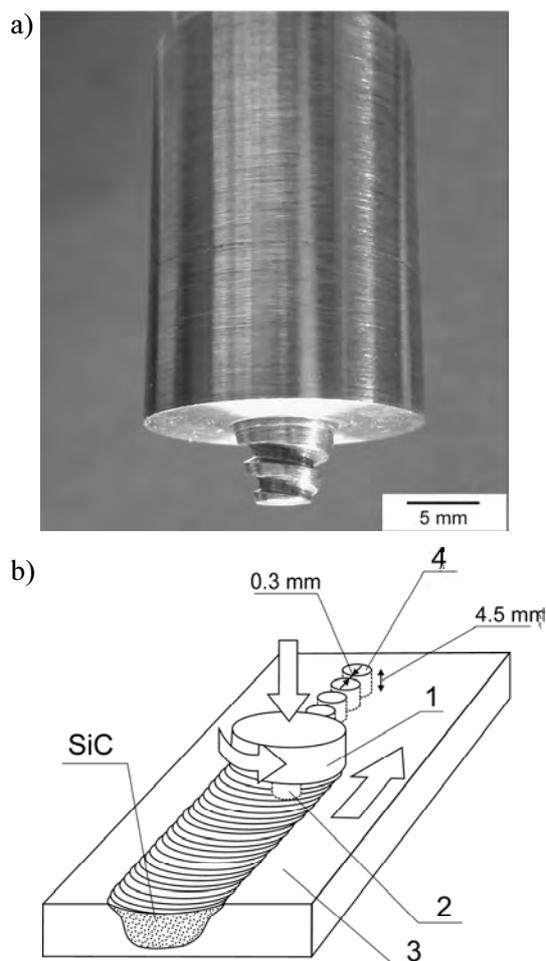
Shape of tool used in FSP treatment (a), diagram of friction stir welding/processing technique (b); 1 - operating tool, 2 - pin, 3 - region of friction stir treatment, 4 - chambers filled with SiC powder
